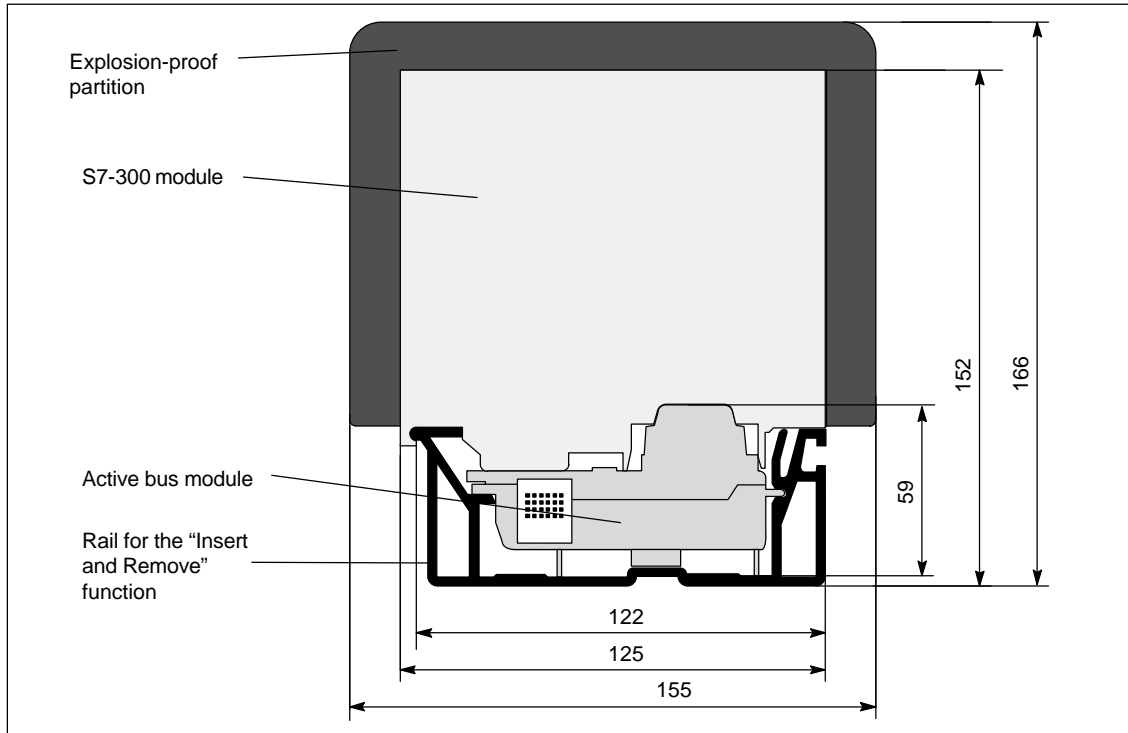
Complete Dimension Drawing of a Rail for “Insert and Remove” Function with Active Bus Module, S7-300 Module and Explosion-Proof Partition
